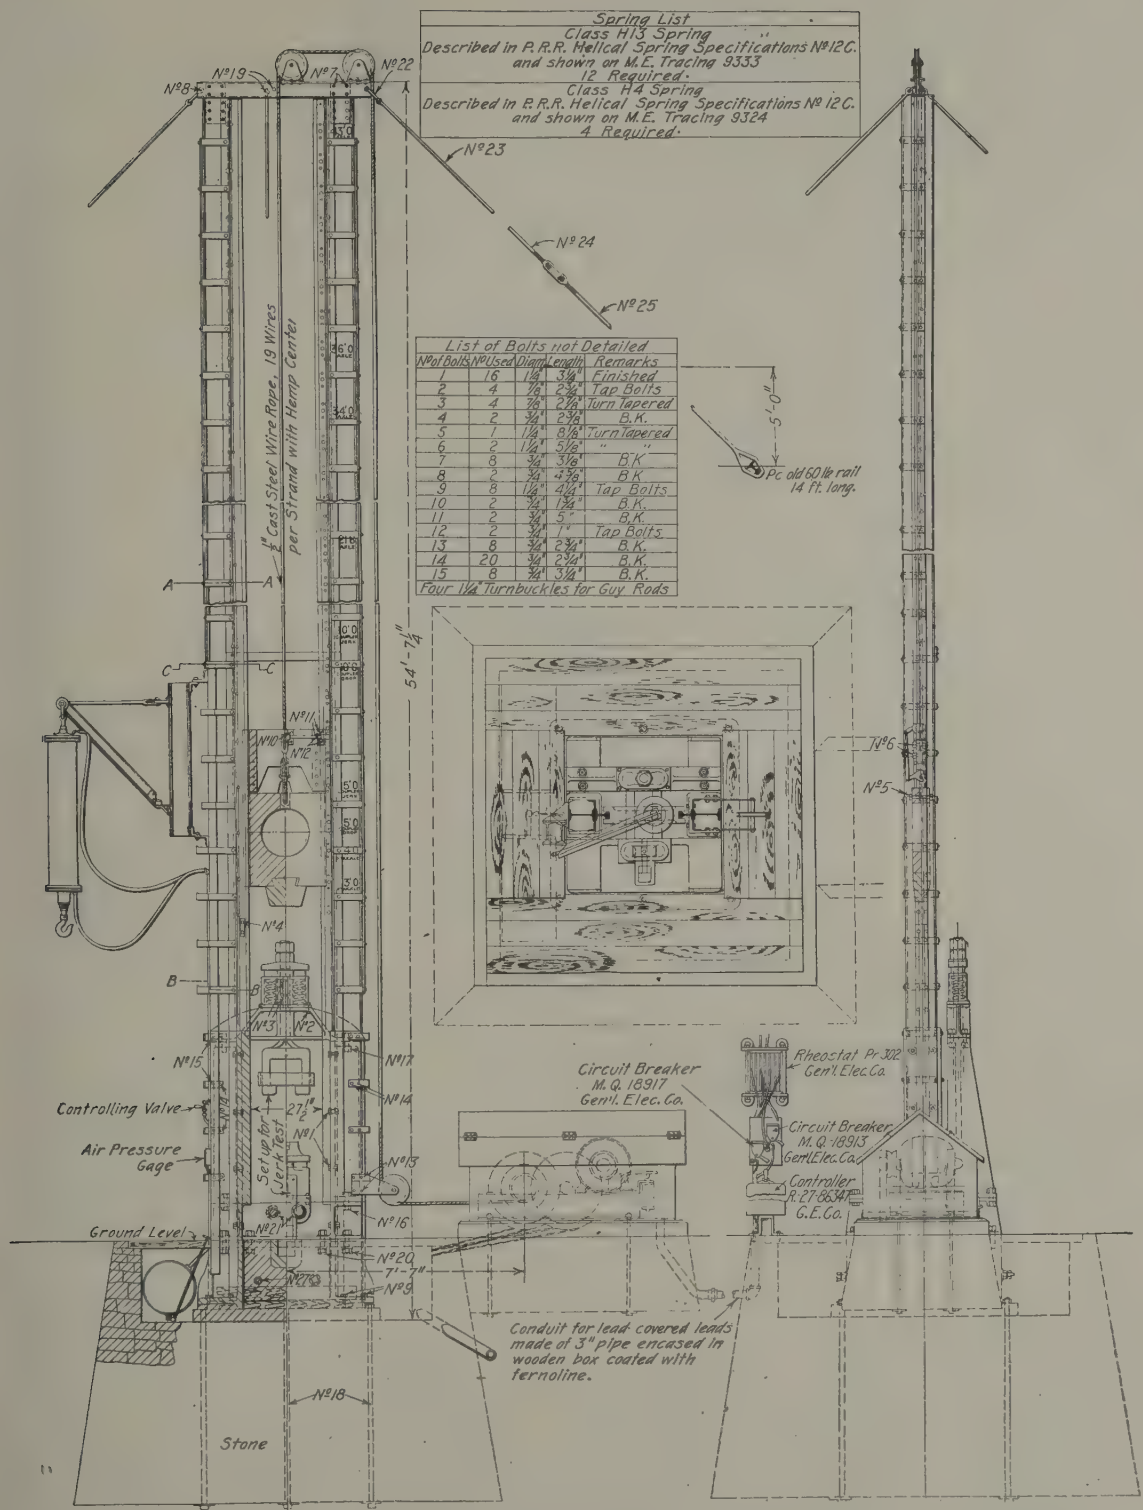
General Arrangement for M. C. B. Standard Drop Test Machine for M. C. B. Couplers and Axles. (M. C. B. Sheet 29.)
